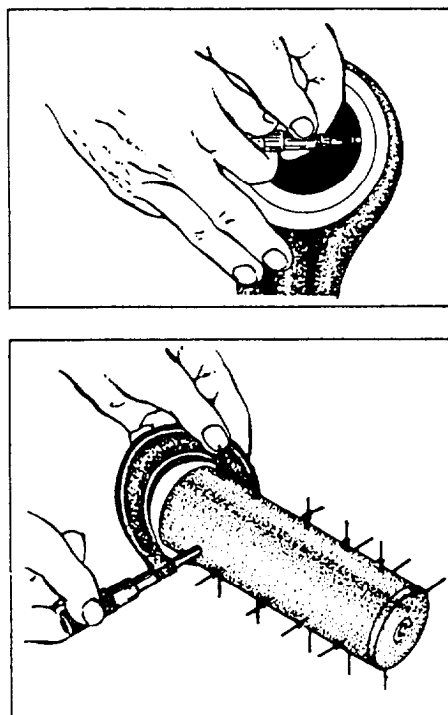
Measuring a piston pin and piston bushing for wear.
